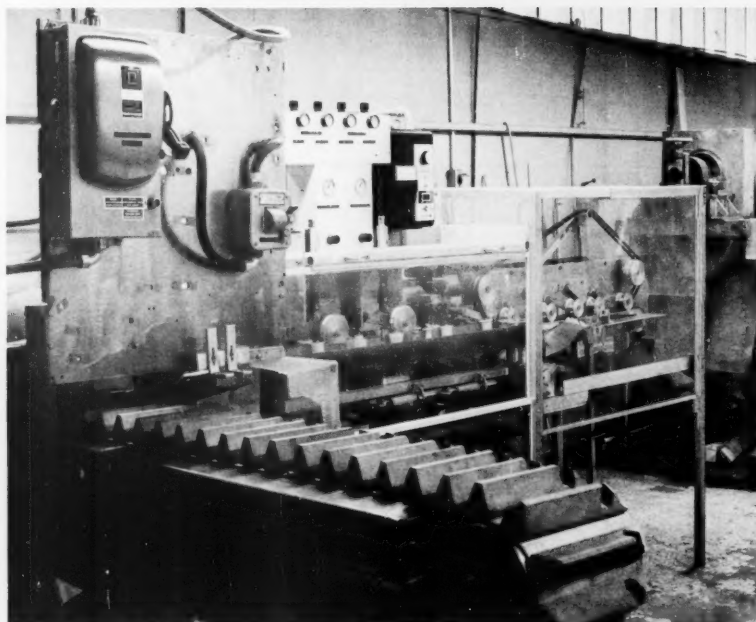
An overall view of the automatic LaPine heading and cleaning machine.
